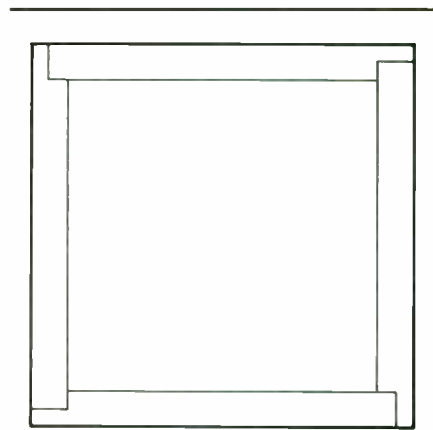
Using rabet joints and "windmill" construction is simple because the pieces tend to self-align in assembly.
